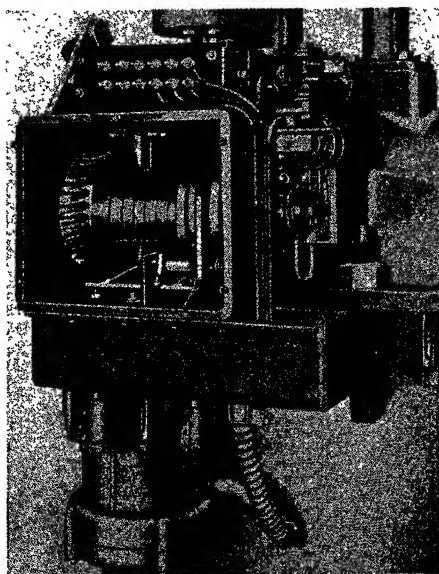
High-speed motor mechanism with "capstan" clutch, front view
